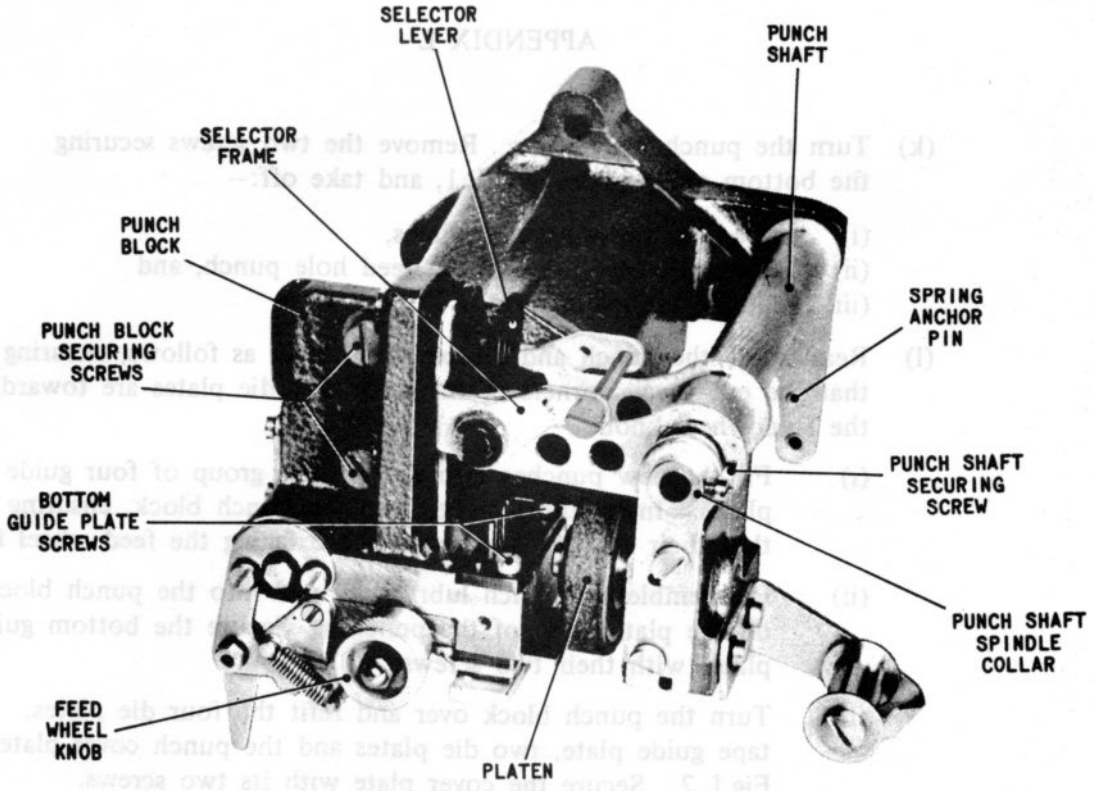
SELECTOR LEVERS ASSEMBLY
